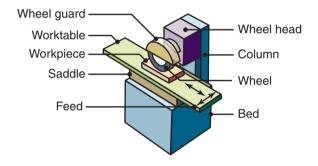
Schematic illustration of a horizontal-spindle surface grinder.
